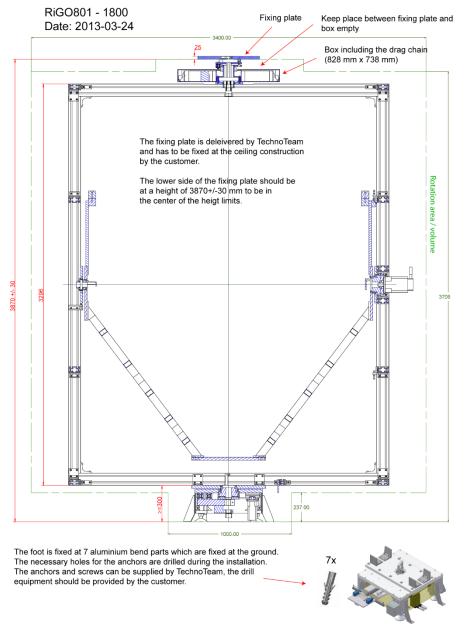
Schematic sectional drawing of RiGO801 - 1800
